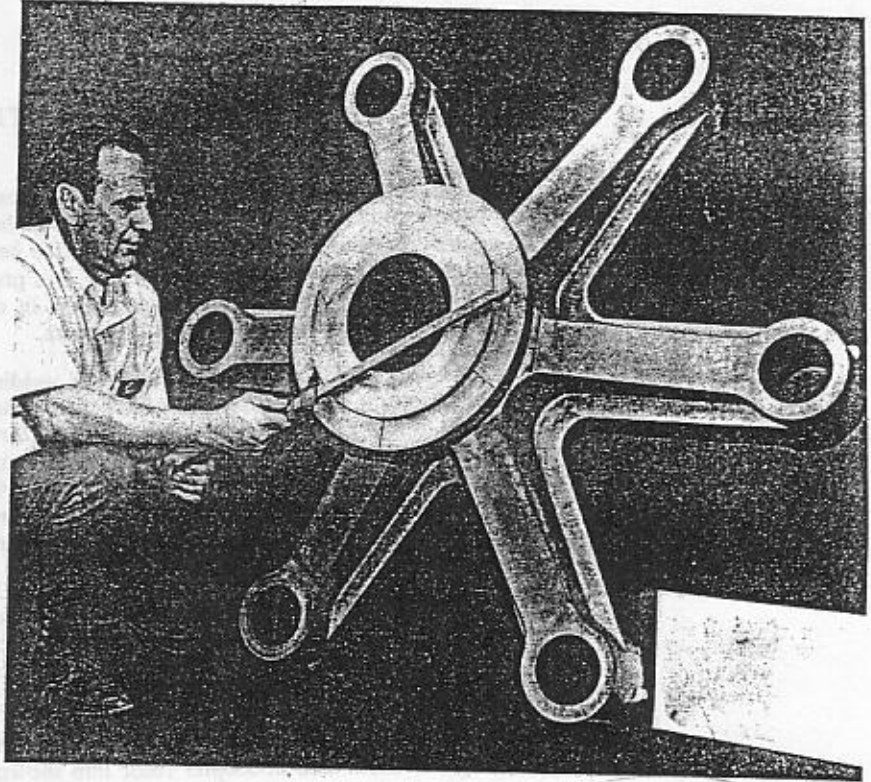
Press diffusion bonded helicopter rotor hub
